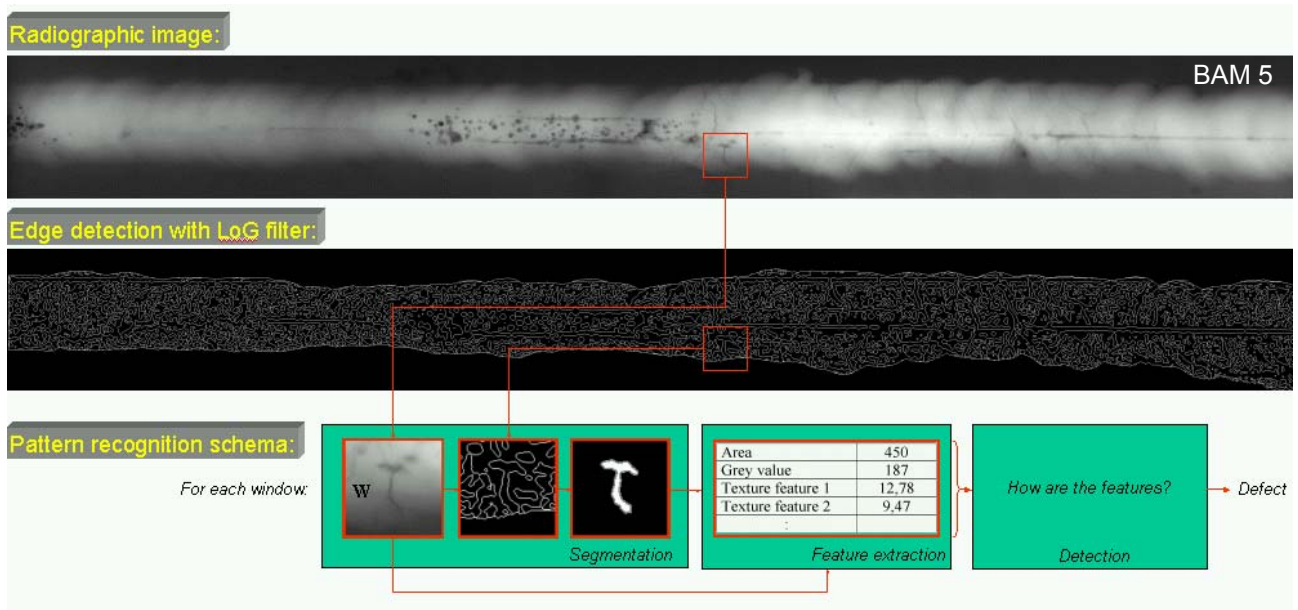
Detection of welding defects using a pattern recognition schema.
